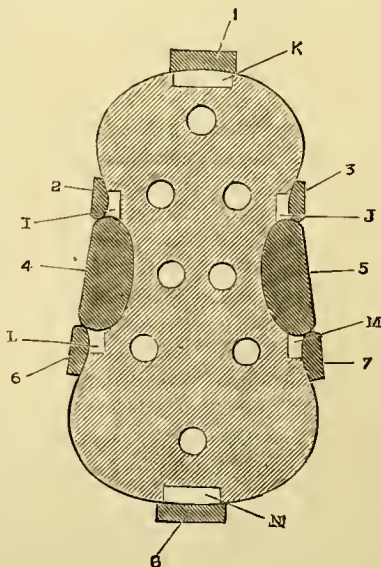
MOULD WITH BLOCKS, FITTED AND SHAPED, SHOWING POSITIONS OF THE CRAMPING BLOCKS.
